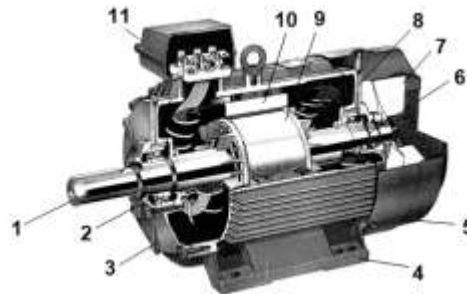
Structure of an asynchronous motor: 1 – shaft; 2, 6 – bearings; 3, 8 – bearing shields; 4 – pawls; 5 – fan casing; 7– fan blade; 9 – short-circuited rotor; 10 – stator; 11 - terminal box.
